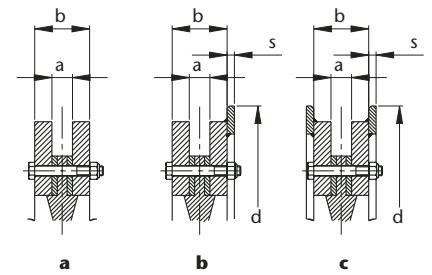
HEKO chain wheel type RUP, toothless with replaceable steel rim segments
